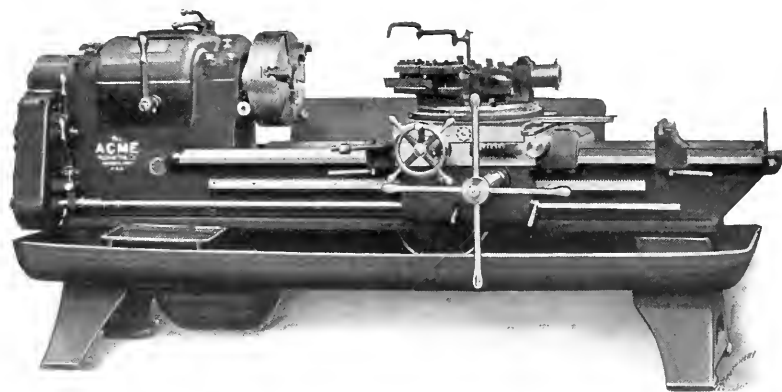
Acme Flat Turret Lathe arranged for Chucking Operations
